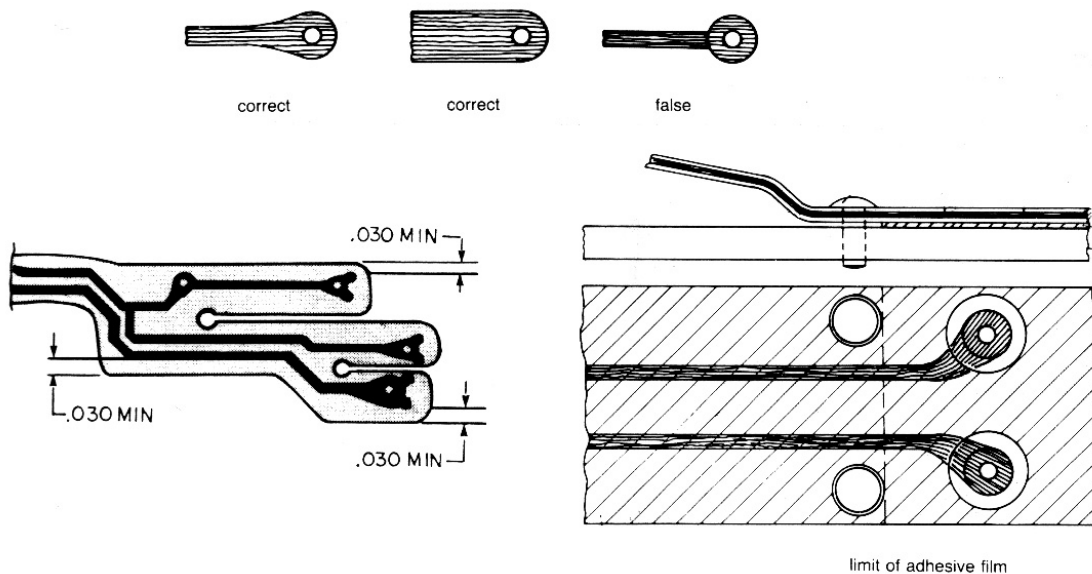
a): Solder lands on flexible prints should be rounded in order to reduce the possibility for failures, b): The contour of the board should be rounded in order to reduce possibilities for tearing (dimensions in inches). The "rabbit ears" on the ends of the metal foil is for obtaining better adhesion to the polyimide. c): Plastic rivets should be used to avoid sharp bends in the interface between the flexible and the rigid parts of the PCB.
